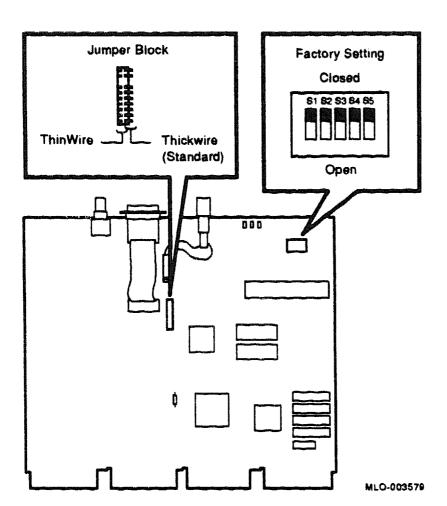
DESQA (M3127-PA) Module Layout/Jumpers
